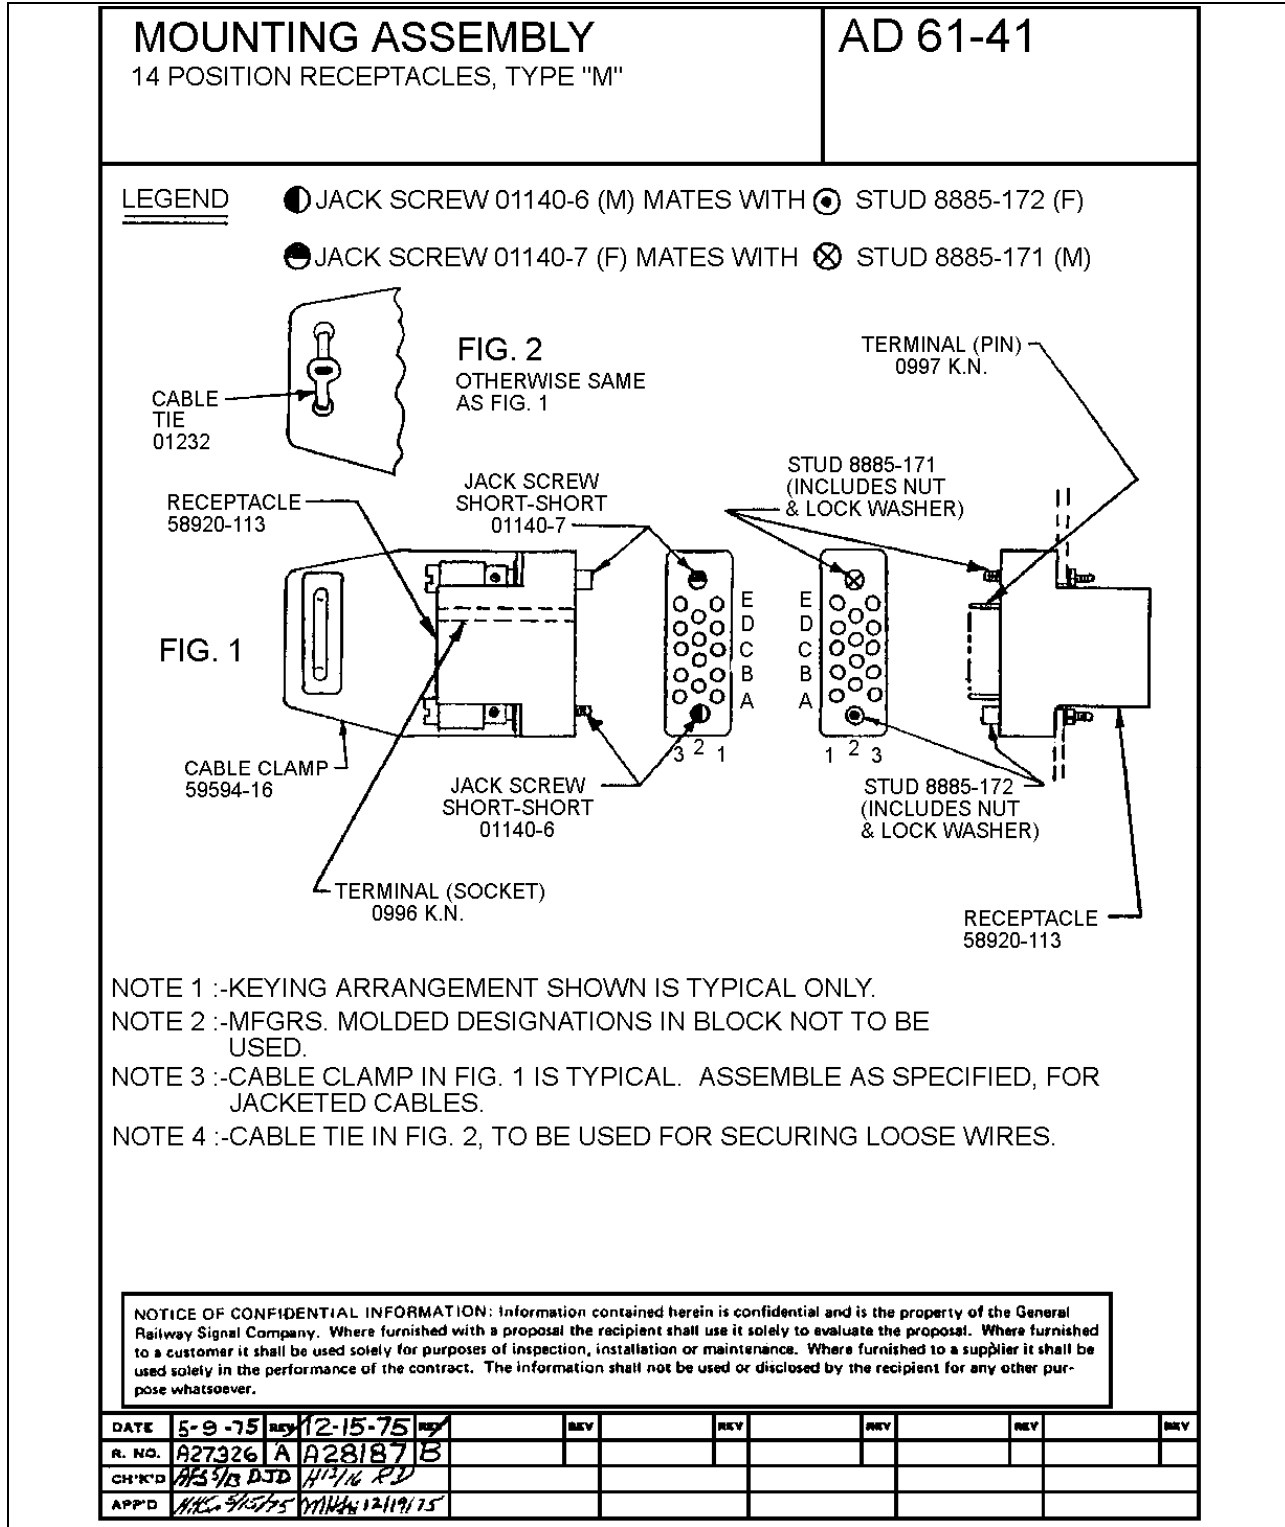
Connector, Plug, 14-Way Mounting Assembly, AD61-41
